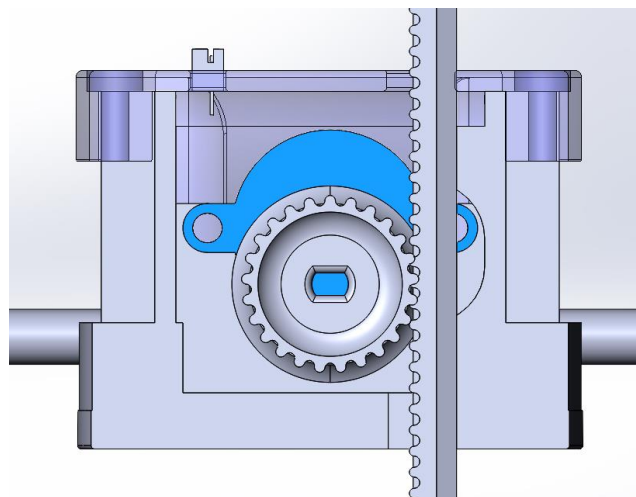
Pairing the rack of the working body with the gear wheel of the carriage
